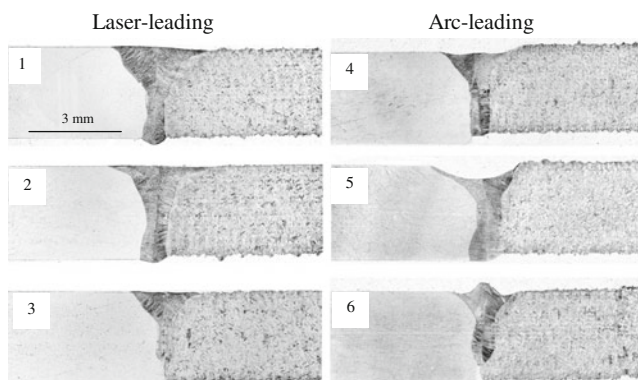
Weld bead profiles for La-TIG and TIG-La configurations (see Table 3 for reference)
